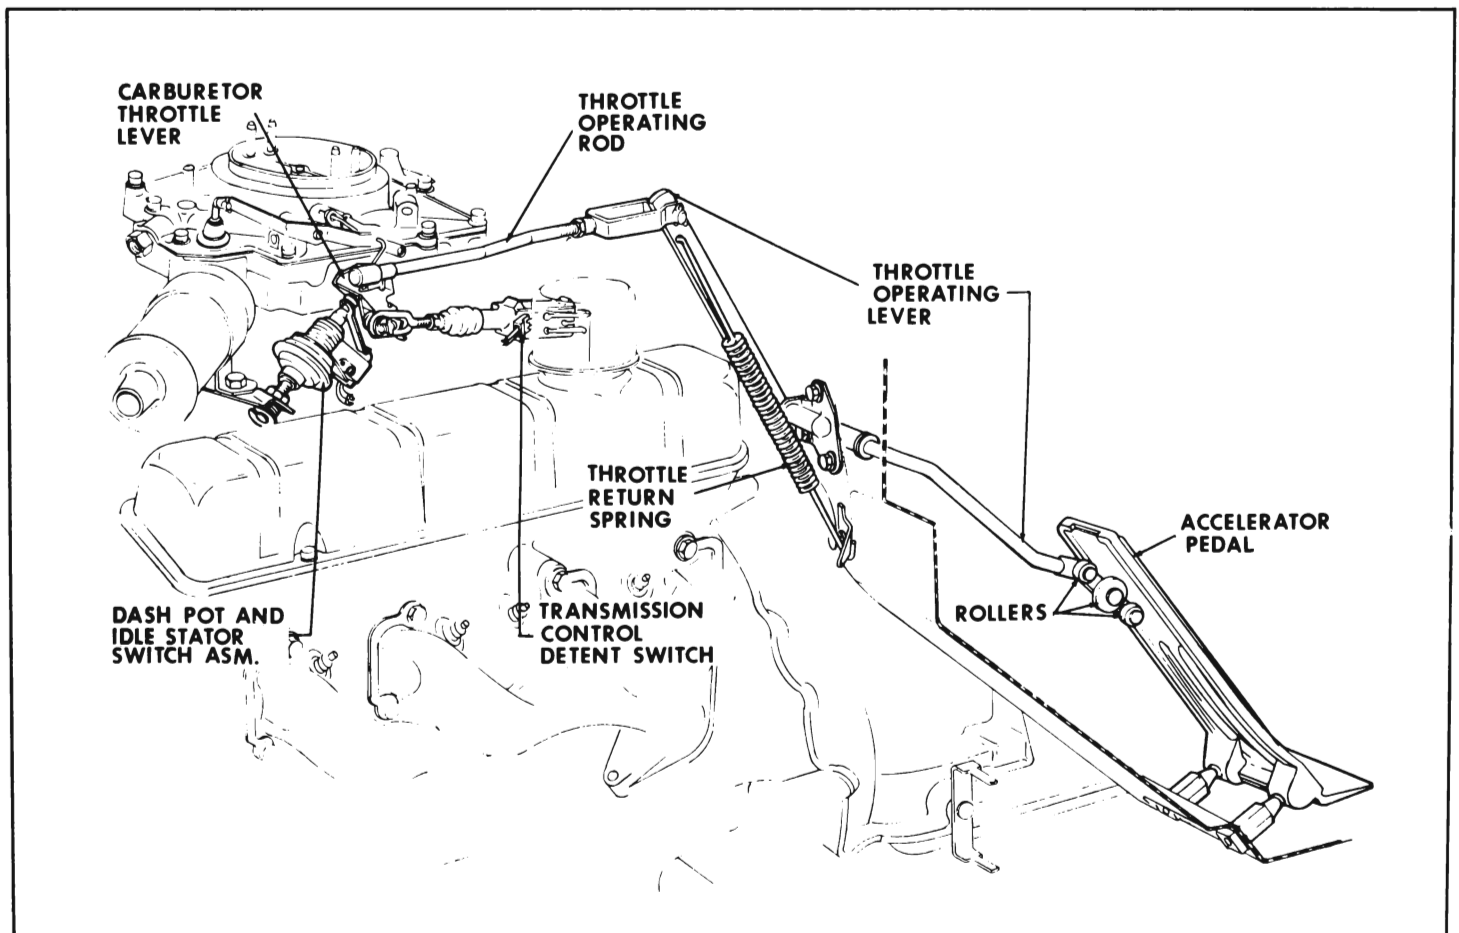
Throttle Linkage and Transmission Control Switches-300 Engine
